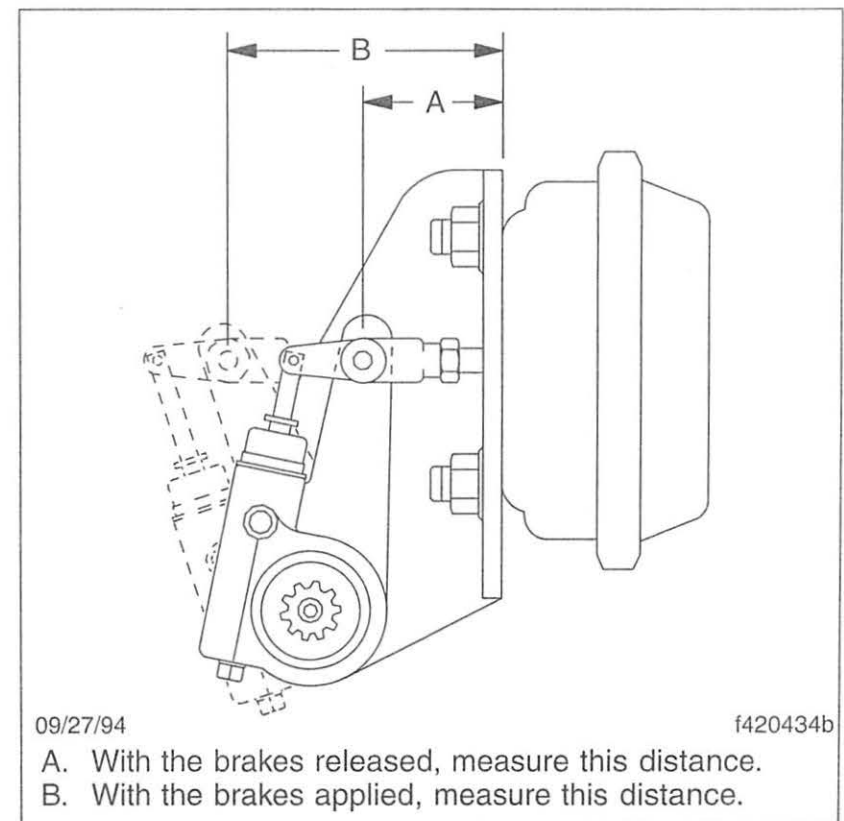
, Brake Stroke Check, Gunitite Automatic Slack Adjuster
